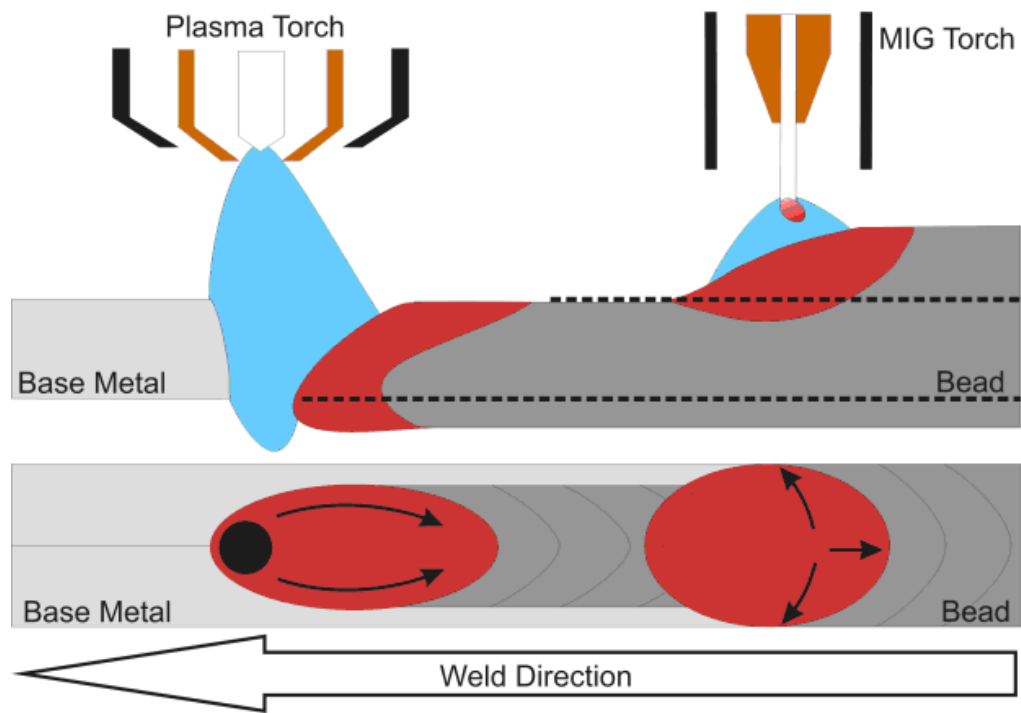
Separation of the weld pool in dual-electrode welding.
